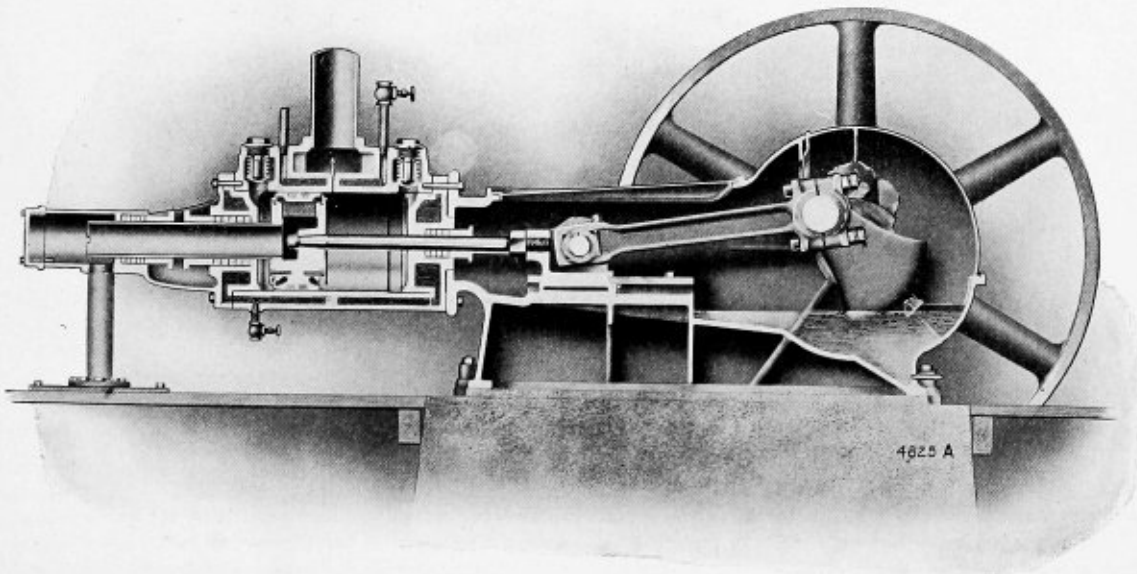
LONGITUDINAL SECTION OF STANDARD CLASS "NE-1" INGERSOLL-RAND COMPRESSOR, WITH "HURRICANE-INLET" AND "DIRECT-LIFT" DISCHARGE VALVE
